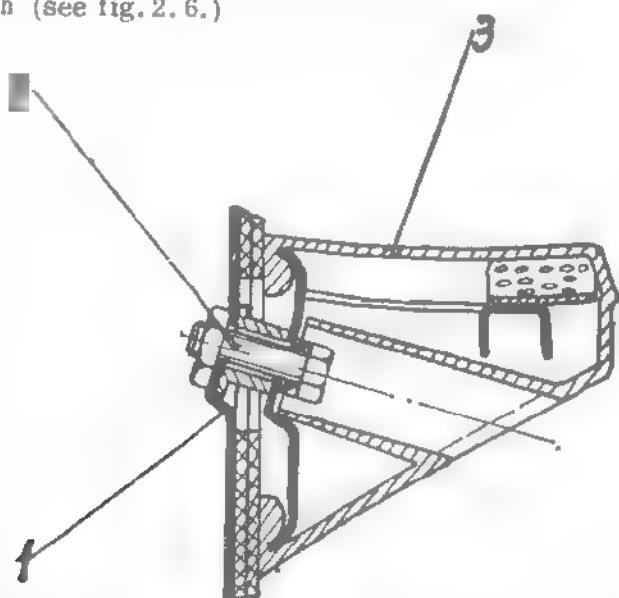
ARM-REST FASTENING ON THE DOOR PANEL
